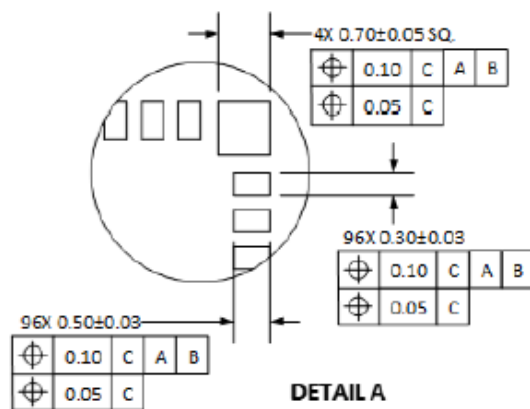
PCB Land Pattern (Top View) - TI351 MHF4 (453-00199) Module
